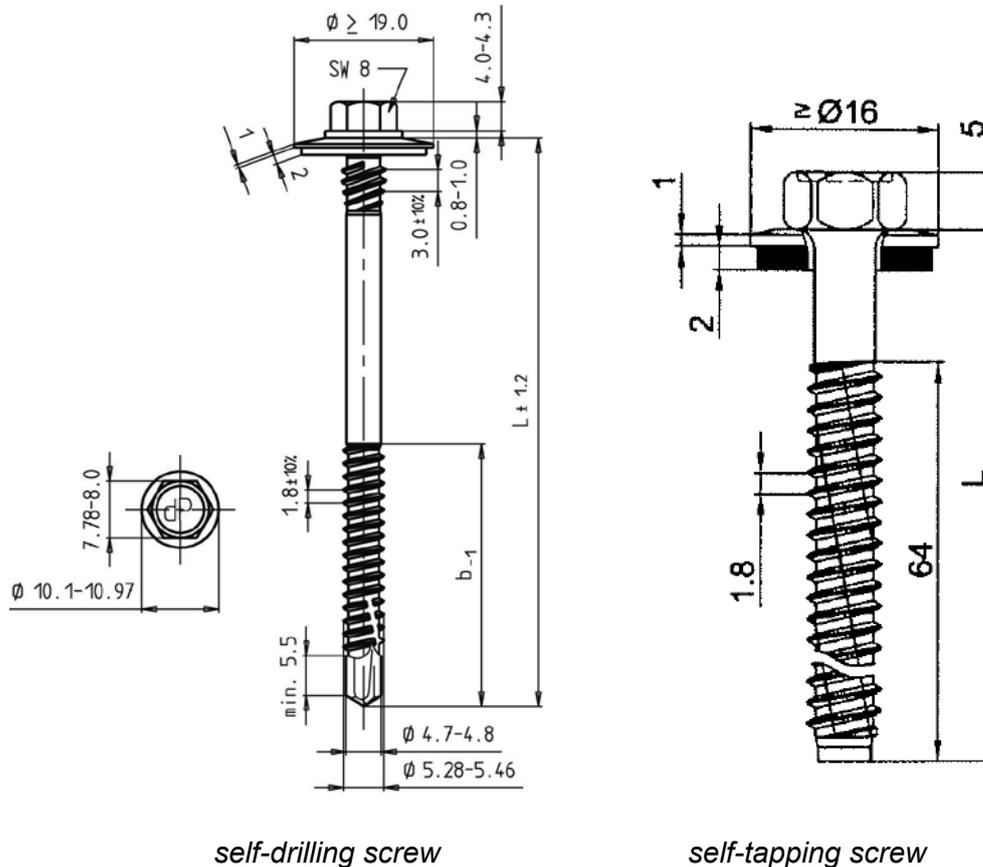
Screw fasteners for fastenings of sandwich panels to substructures
